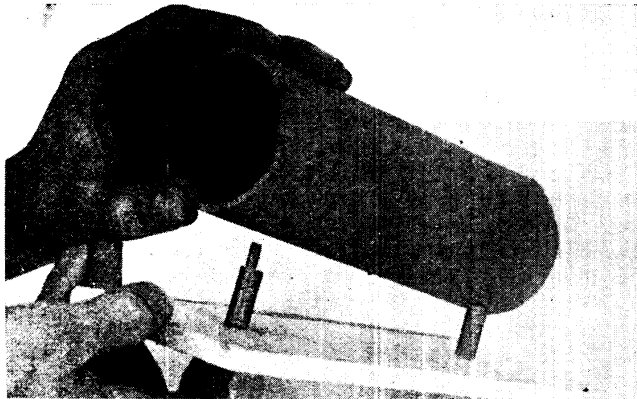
Bolts and nuts passed through a baseboard, or panel, form a secure means of holding a tube. Note the distance pieces between the tube and the panel
